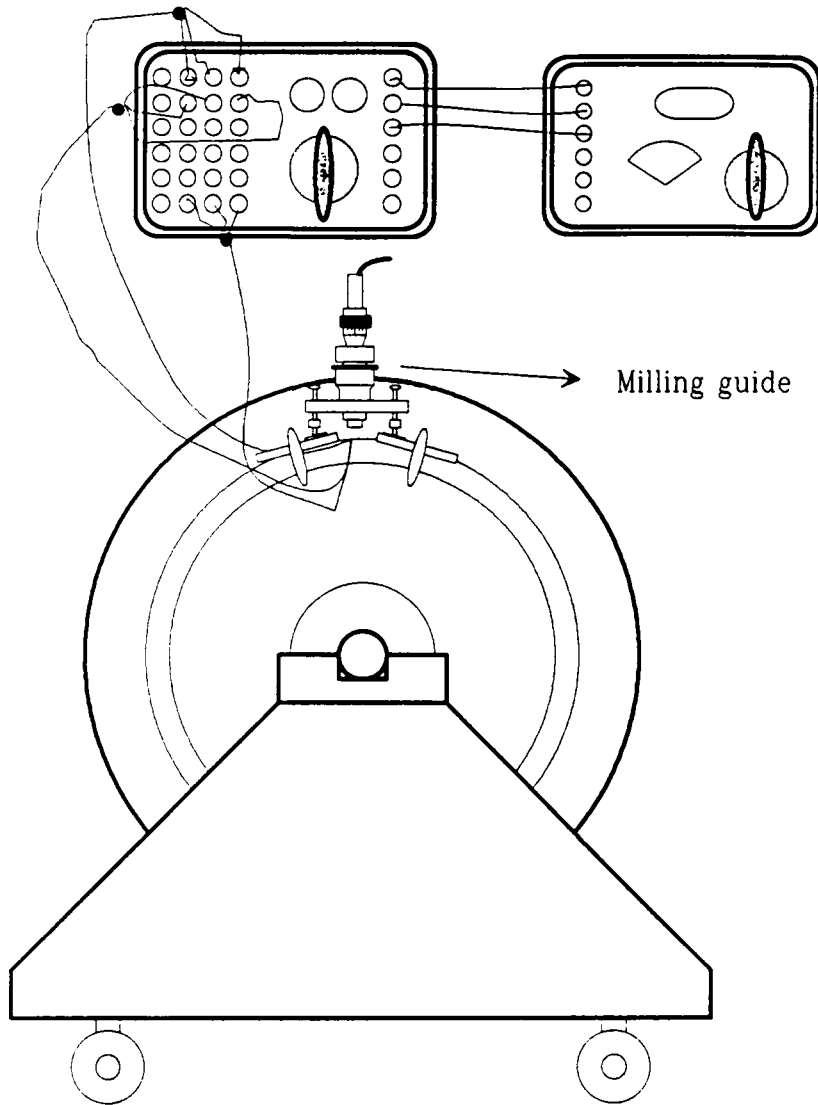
Schematic drawing of vertical wheel carrier with the hole drilling device mounted.
